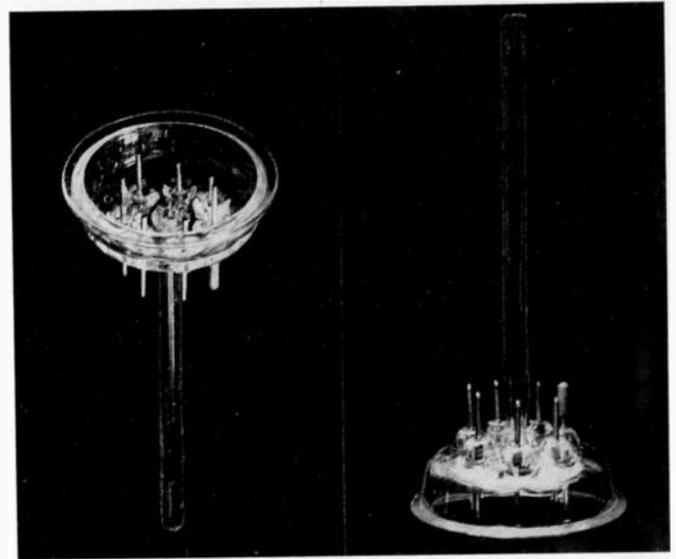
Molded-flare stem as used on the RCA-826 and RCA-829.
